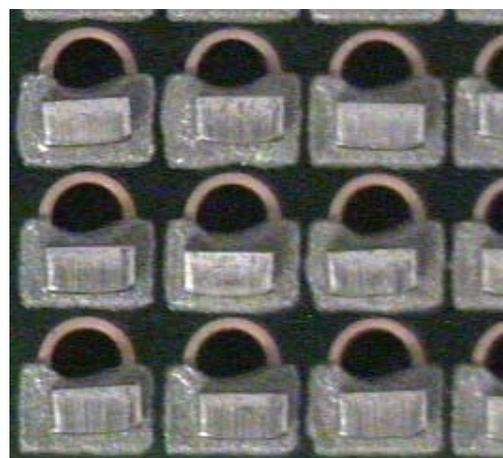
Solder paste is printed and the preforms are placed on the paste as shown.
